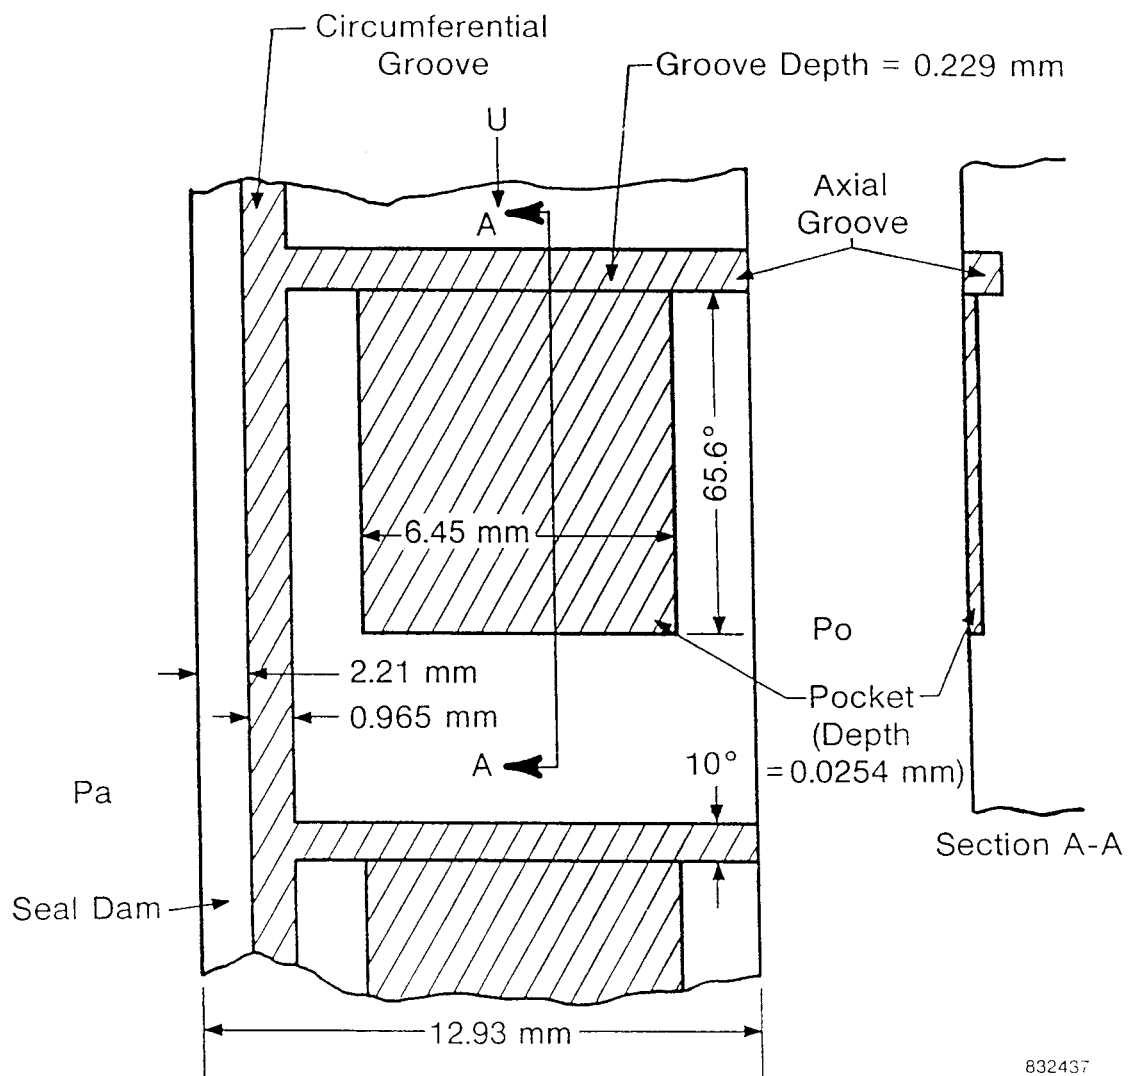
Developed View of 50-mm Rayleigh-Step Pad
